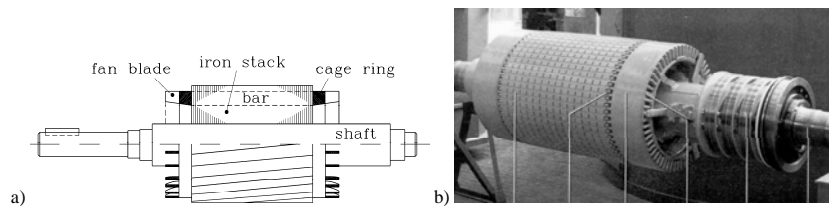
Rotor of induction machine: a) Squirrel cage, consisting of (here skewed) rotor bars and two outer rings, short circuiting the bars. Bars are inserted in slots in rotor iron stack. Here cage consists of die-cast aluminium. Note the additional "fan blades" on the outside of the cage rings to generate additional circulating air flow for rotor cage cooling. b) Wire-wound three phase winding with slip-ring per phase: 1: Rotor iron stack, 2: rotor winding, 3: bandage fixing winding overhang, 4: winding connection to slip rings, 5: slip rings, 6: shaft (Siemens AG).
